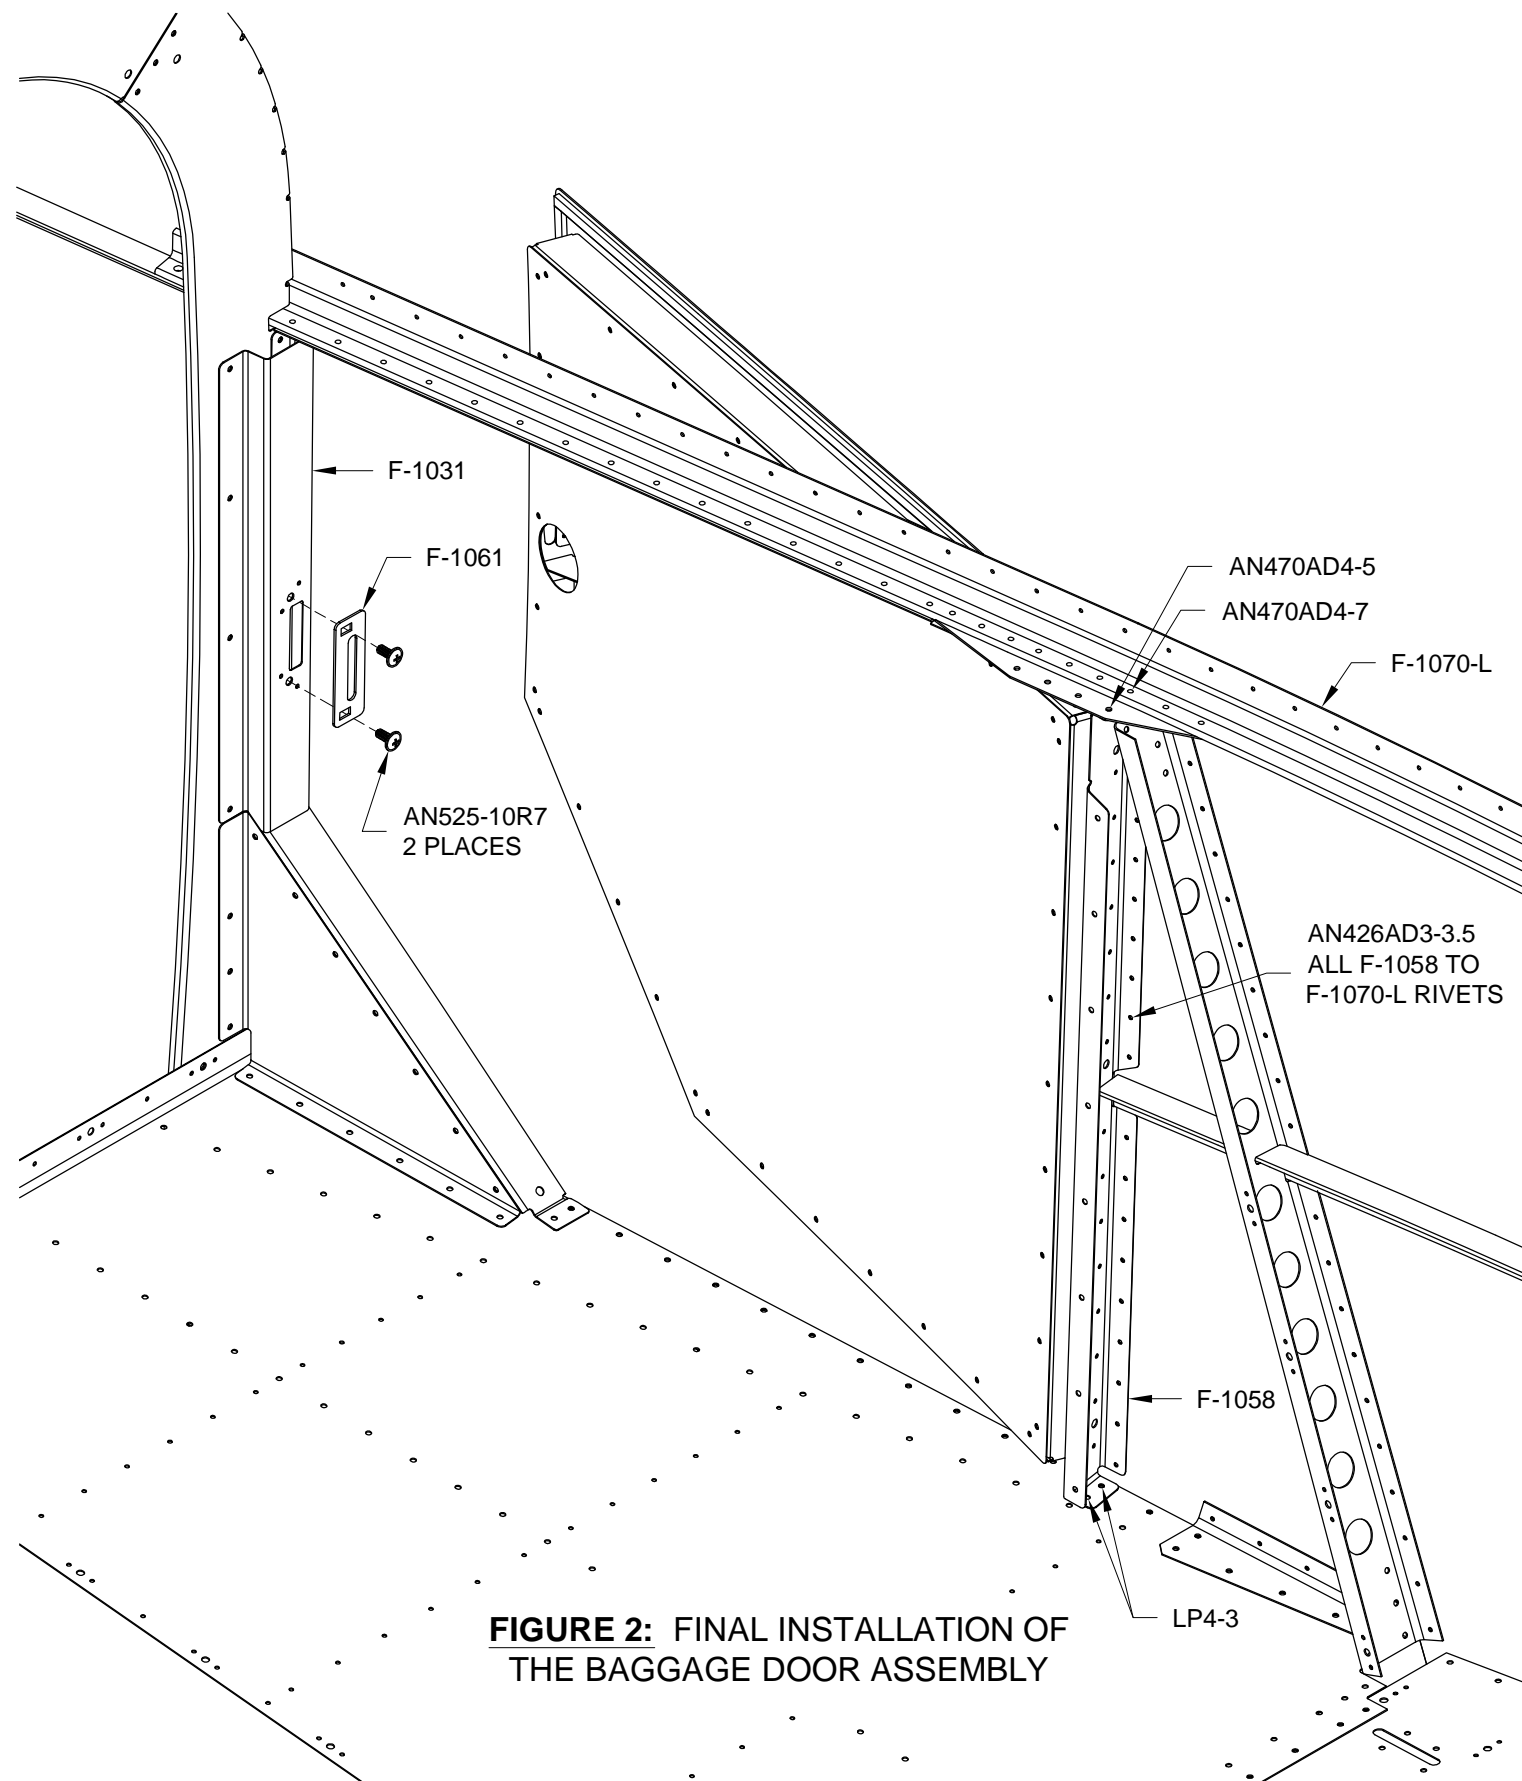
FINAL INSTALLATION OF THE BAGGAGE DOOR ASSEMBLY
